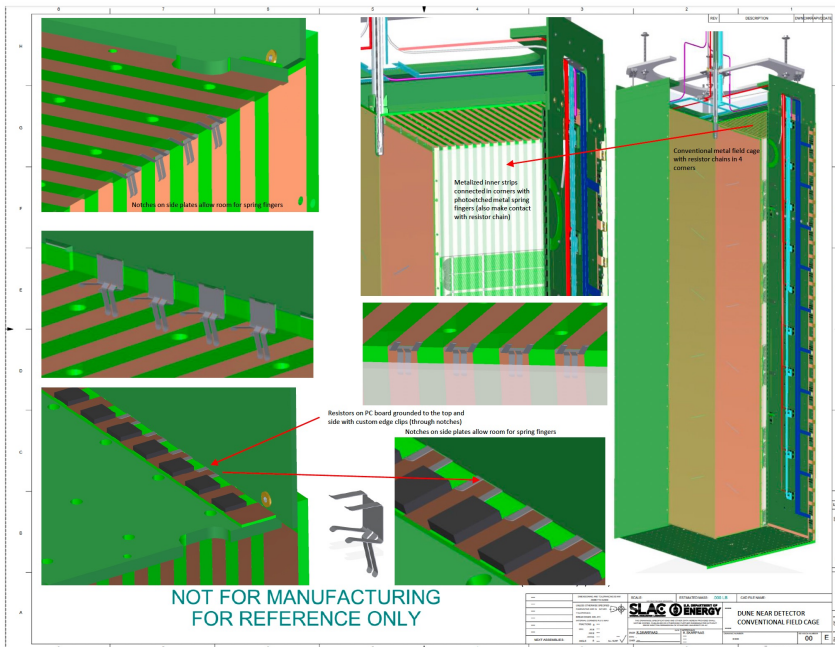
An assembly drawing of the module using a multiple resistor chains and metallized strips for field shaping.
